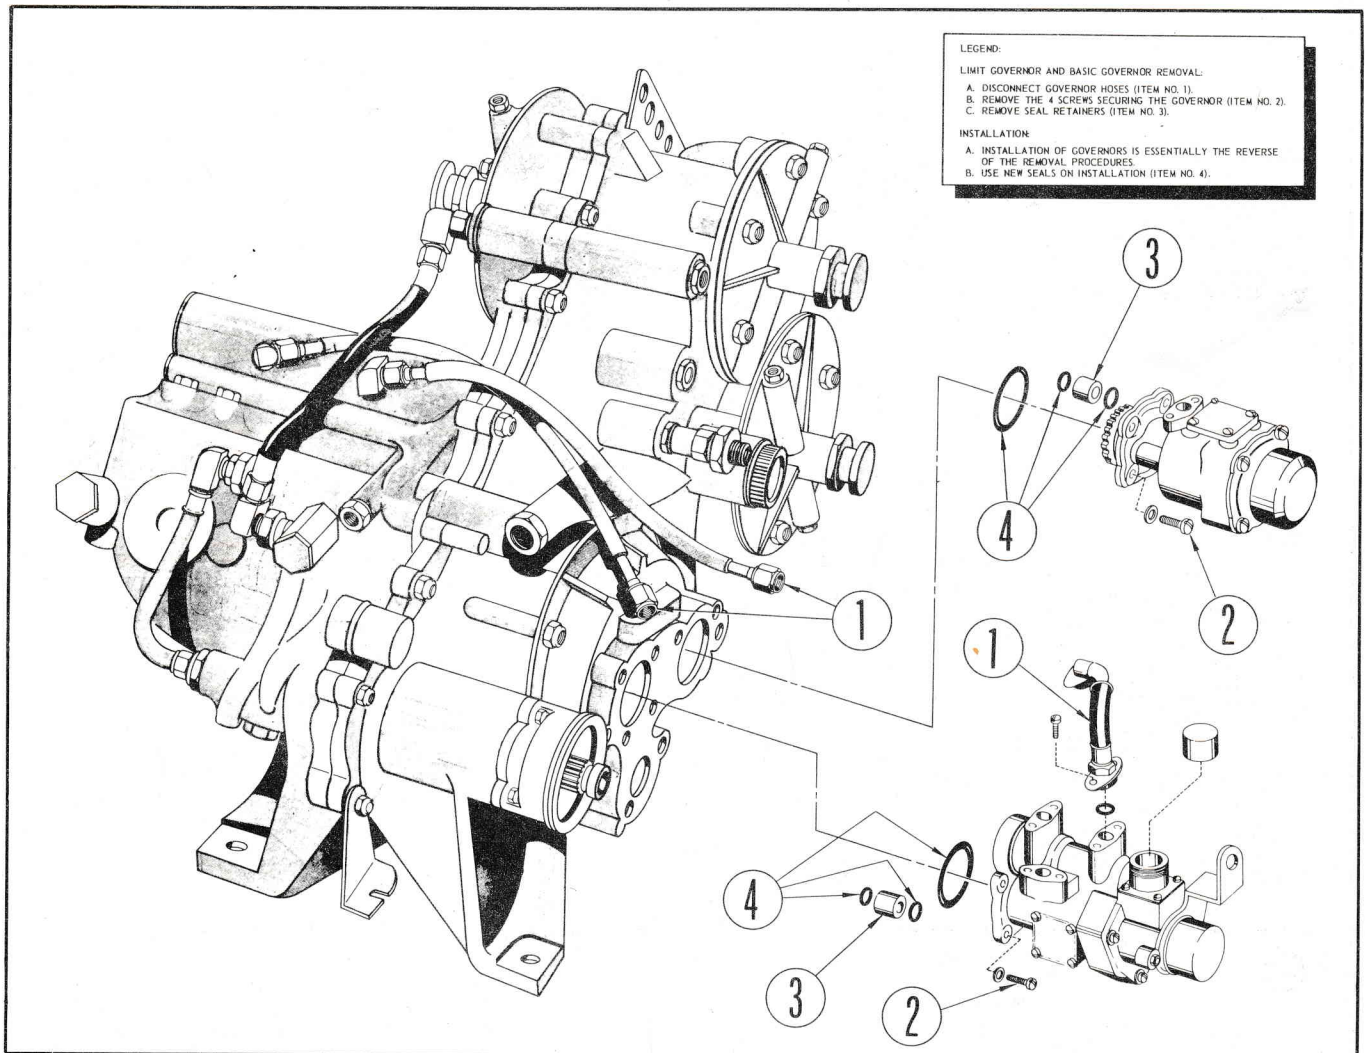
Replacement, Constant-Speed Drive Limit and Magnetic Trim Governor.
